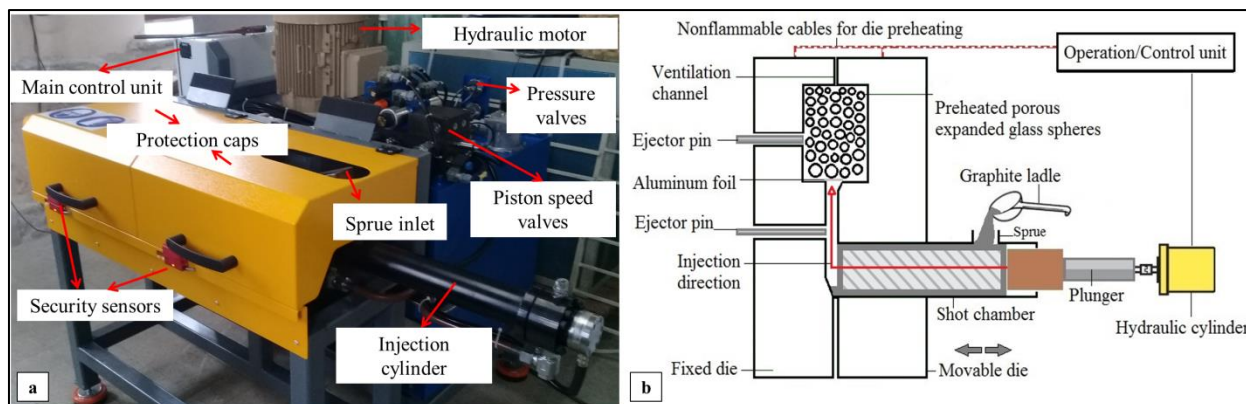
Real special purpose cold chamber die casting machine (a) and schematic view of the process (b)
